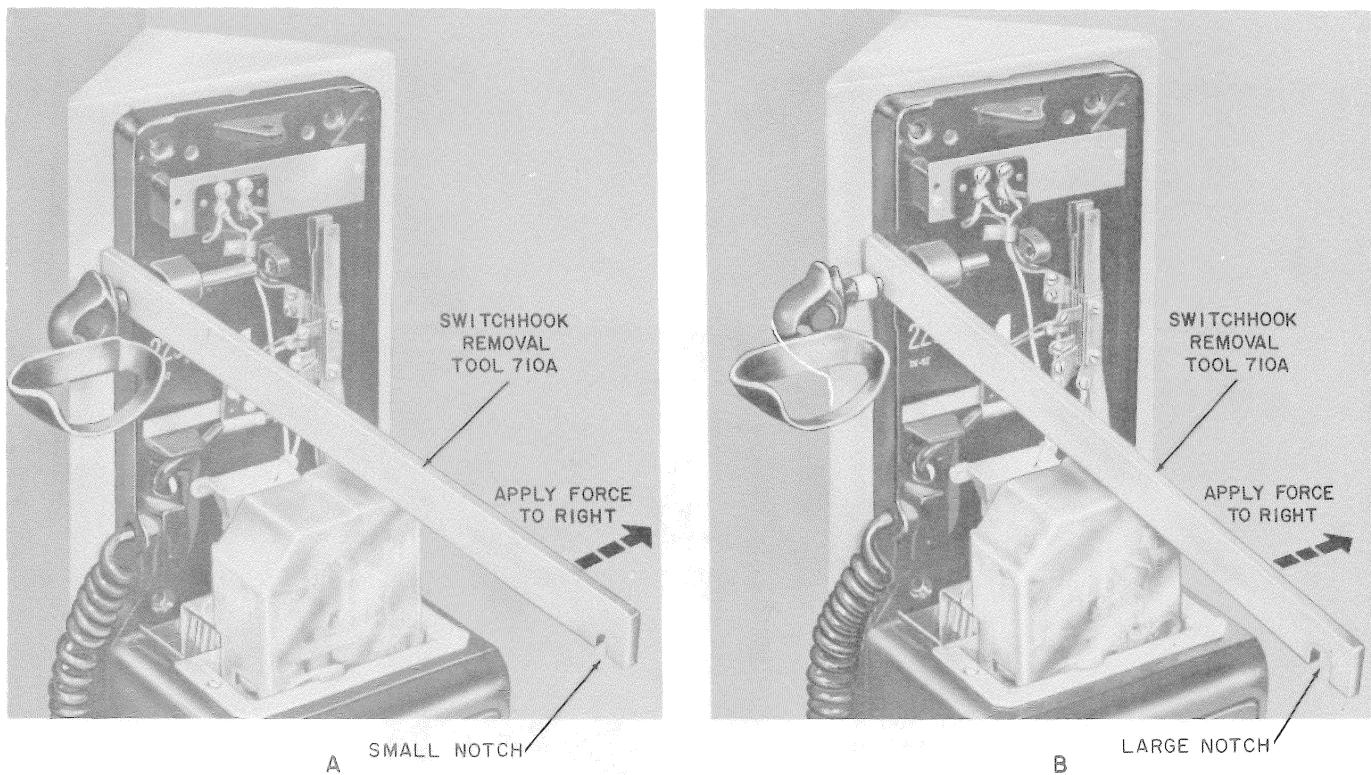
Removal of One-Piece Switchhook Located in Corner
